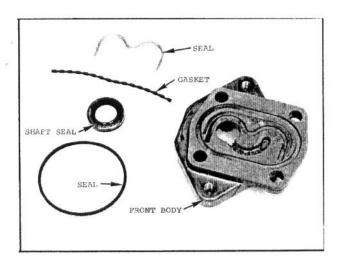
SEALS AND GASKET REMOVED FROM FRONT BODY
